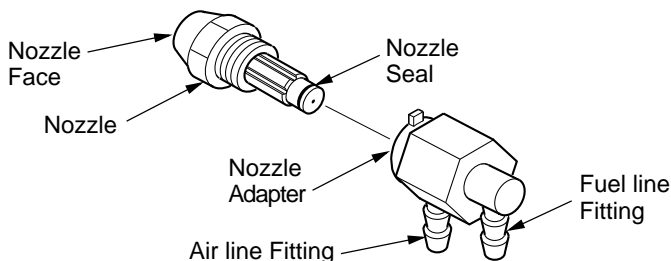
Nozzle and Nozzle Adapter, 35,000 Btu/Hr Model
